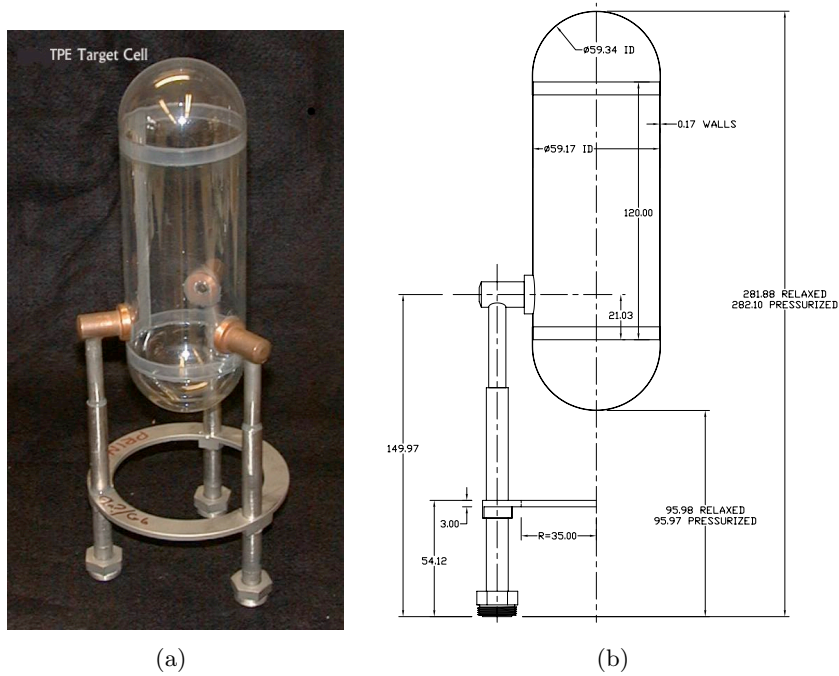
TPE liquid hydrogen target cell, (a) Photograph of the TPE target cell. The mylar container is attached to hollow stainless steel legs with copper nozzles. (b) Engineering drawing of the TPE target with dimensions in mm [33].
